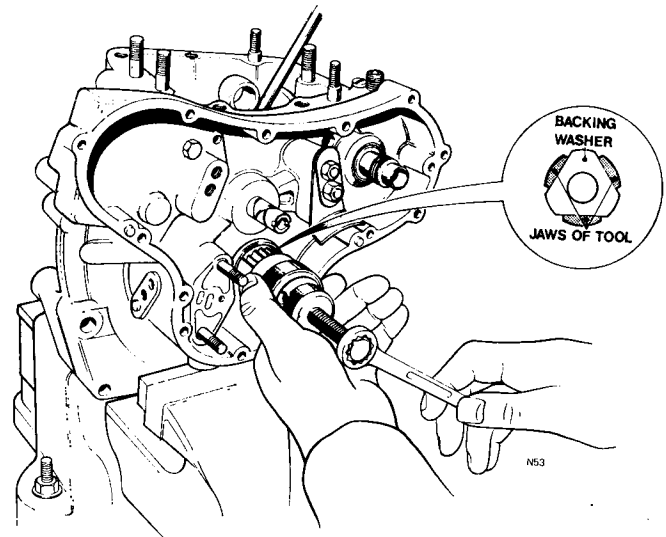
Extracting crankshaft pinion using tool ET 2003
